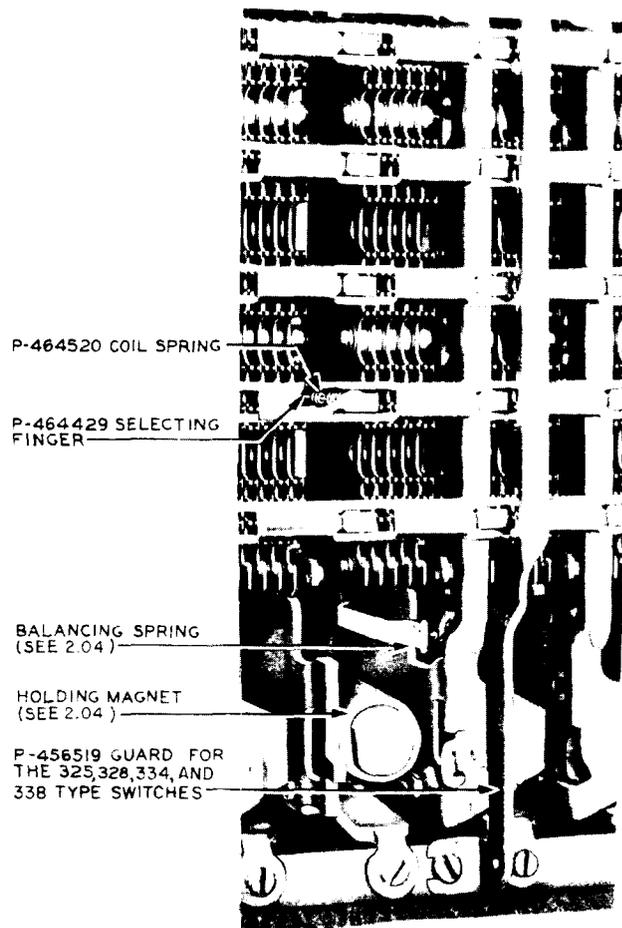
Partial Front View of Switch Showing Vertical Unit With Holding Armature Removed
